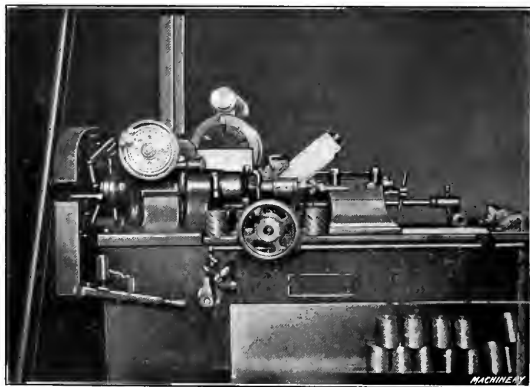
Thread Milling Machine used for cutting Worms and Tapered Hobs
